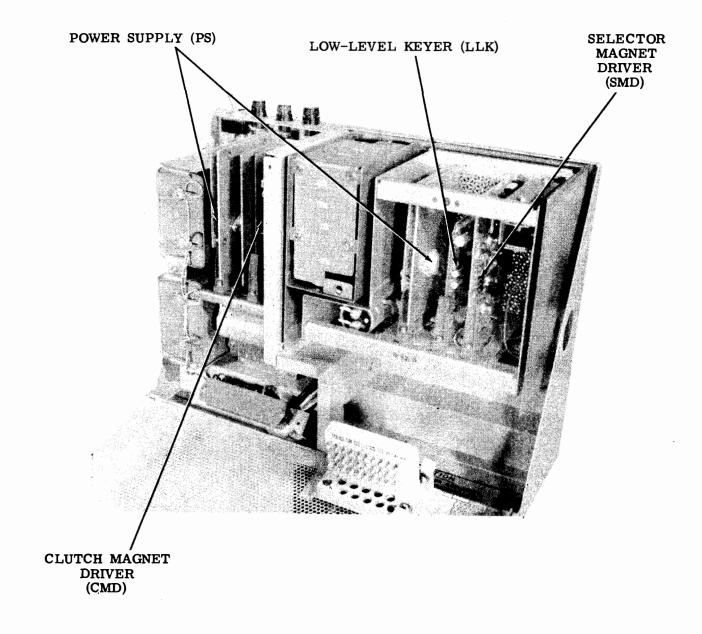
Typical Parts of an ESA - Single Box Construction (Cover Removed)
